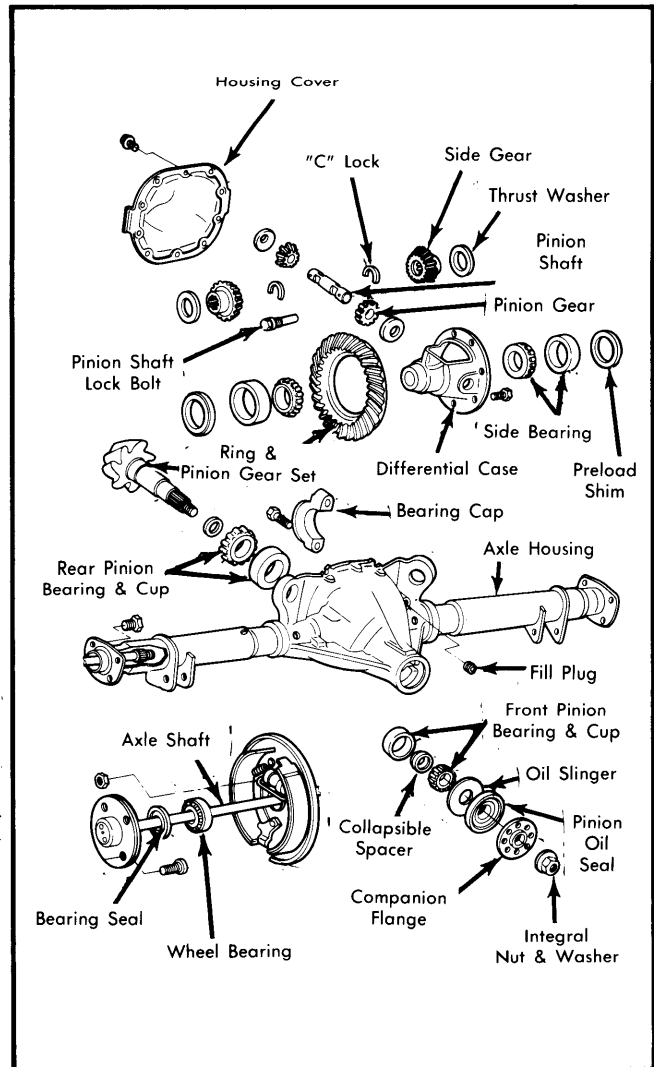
Exploded View of Ford Motor Co. 7 1/2" & 8 1/2" Integral Housing Axle Assembly
